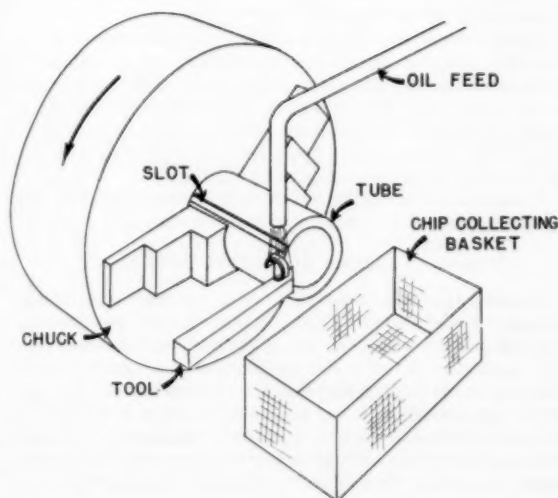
ORTHOGONAL MACHINING ON END OF STEEL TUBE
